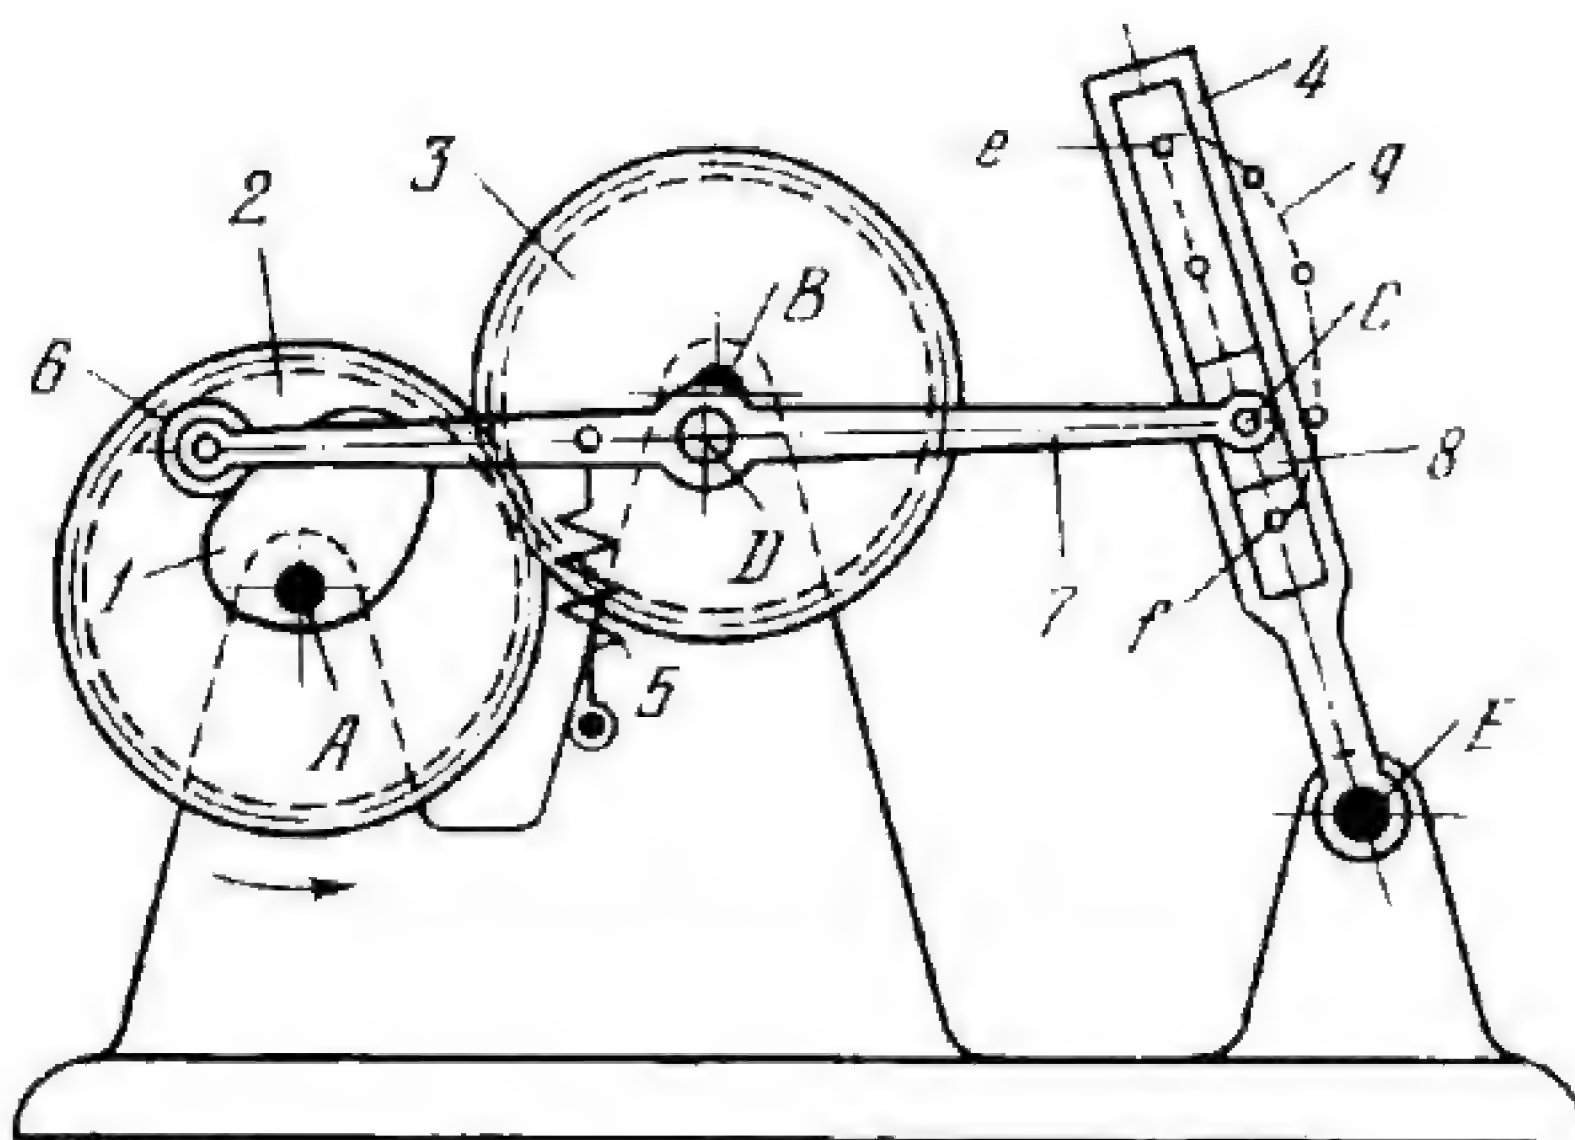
rotates about fixed axis *A* and is rigidly attached to gear 2 which meshes with gear 3. Gear 3 rotates about fixed axis *B* and is connected by turning pair *D* to link 7 which carries roller 6, rolling along the contour of cam 1. Link 7 is connected by turning pair *C* to slider 8, moving along the slot of link 4 which turns about fixed axis *E*. The working surface of cam 1 is designed so that point *C* of link 7 describes path *q* of which portion *e-f* is a straight line. Consequently, slotted link 4 has a dwell while point *C* moves along portion *e-f* of path *q*. Roller 6 is held in contact with cam 1 by spring 5.
